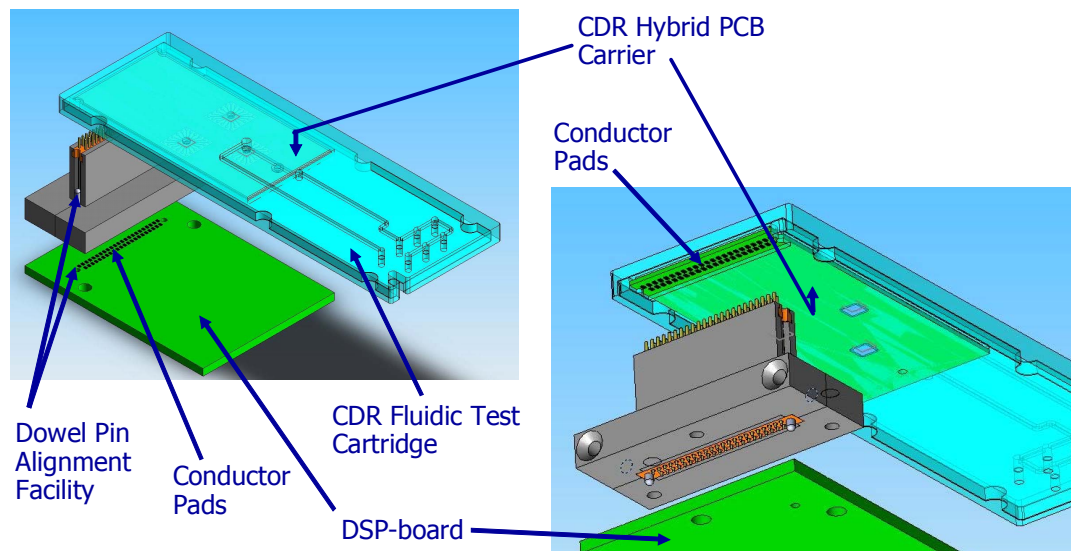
Connector arrangement between PCB in fluidic cartridge and electronics board of the readout instrument
